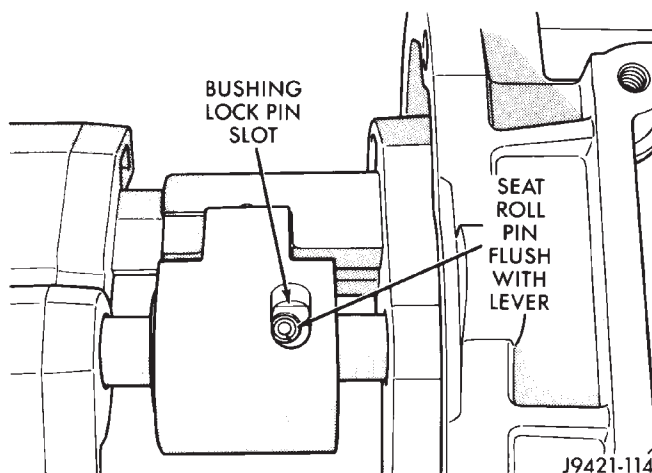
Correct Seating Of Shift Shaft Lever Roll Pin
